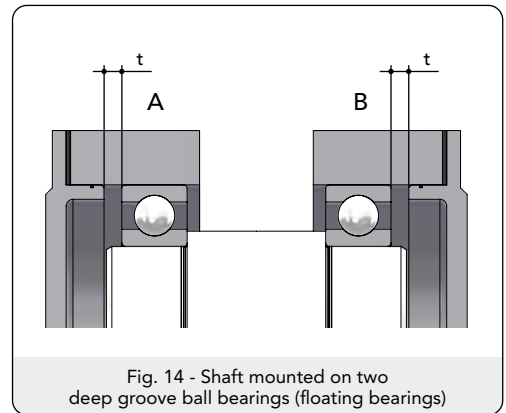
Shaft mounted on two deep groove ball bearings (floating bearings)
